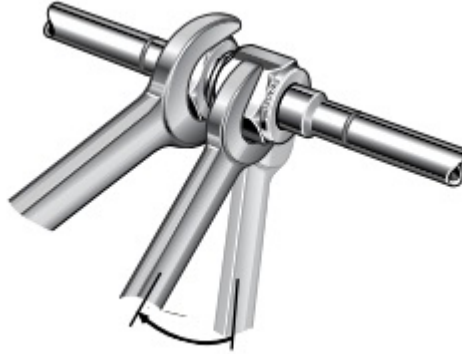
Connection of the DAQ cooling pipe to the dividing manifold.
